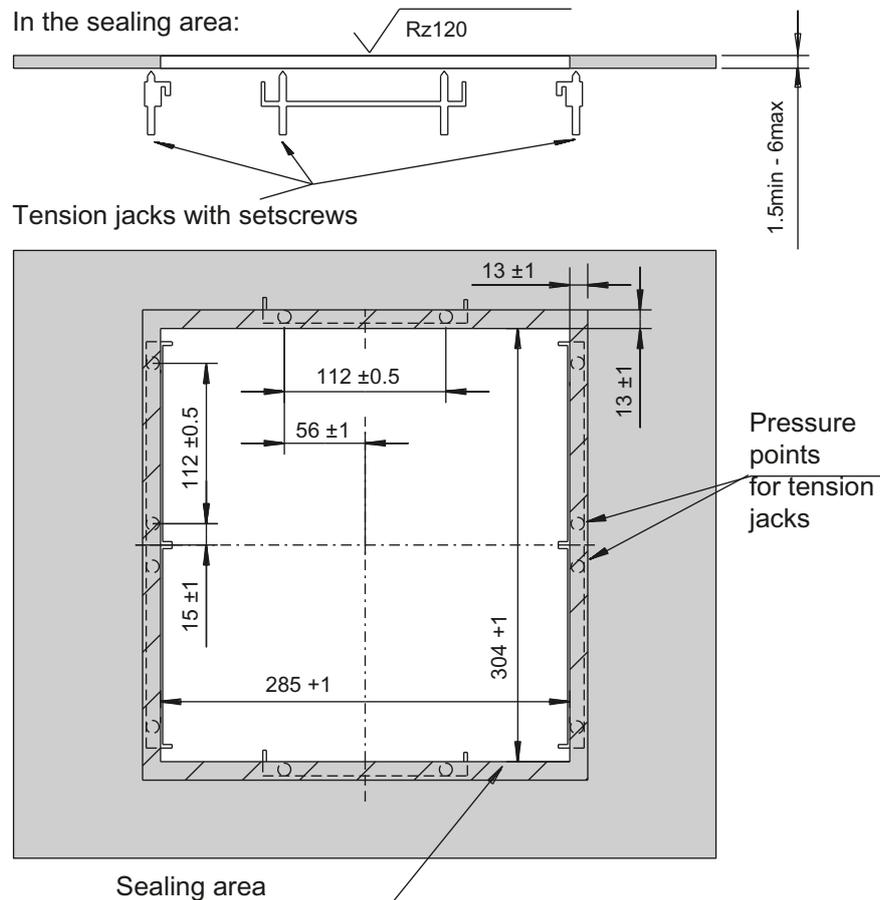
Dimension sheet for installing the OP 010S operator panel front
